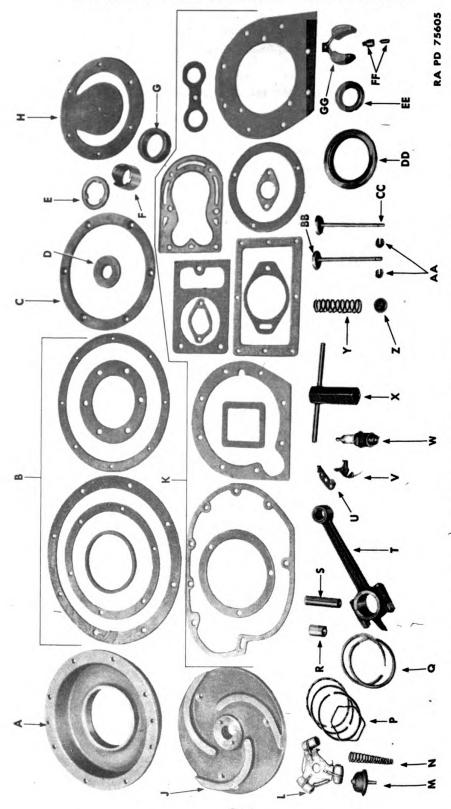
Engine-driven Centrifugal Pump Spare Parts and Accessories
